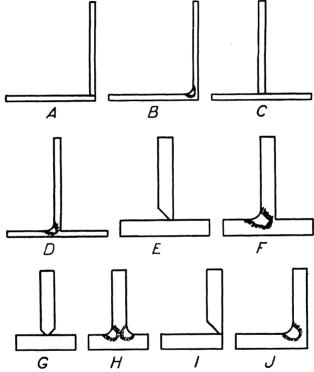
Preparing metal for inside corner edge and tee welding: A. Thin metal edge weld, B. Same as A but after welding, C. Tee weld, thin metal, D. Tee weld after welding, E. Single chamfer tee weld for thick metal, F. After welding, G. Double chamfer "Tee" weld, H. After welding, I. Edge weld, single bevel for thick metal, J. After welding
